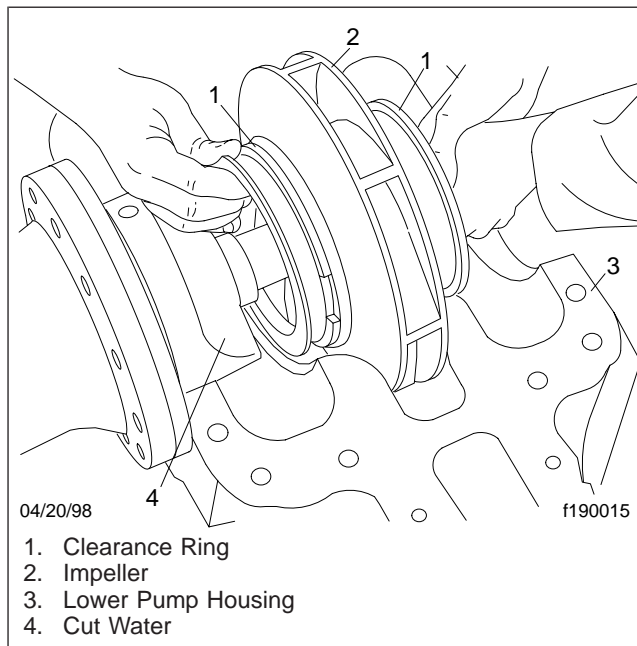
, Lifting the Impeller Assembly from the Lower Pump Housing
